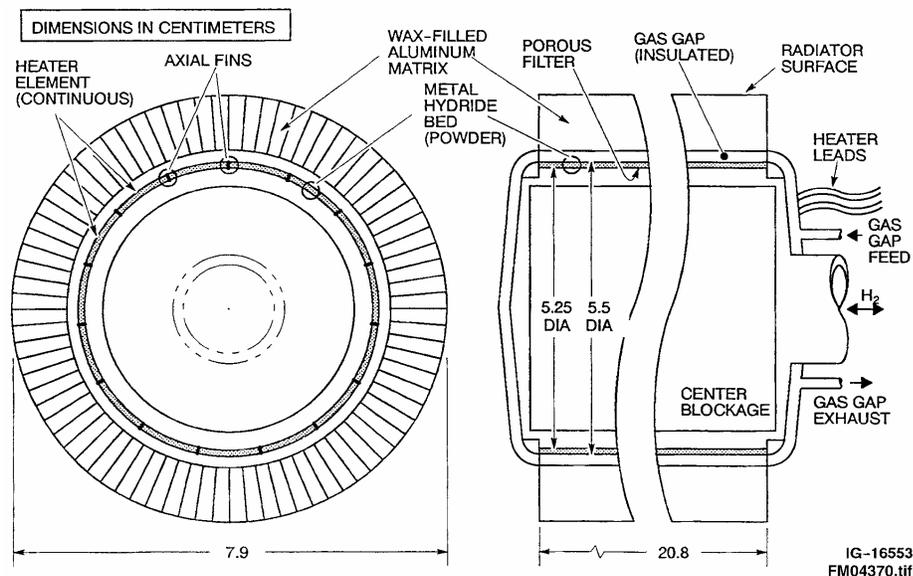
Low-pressure Metal Hydride Bed Assembly
